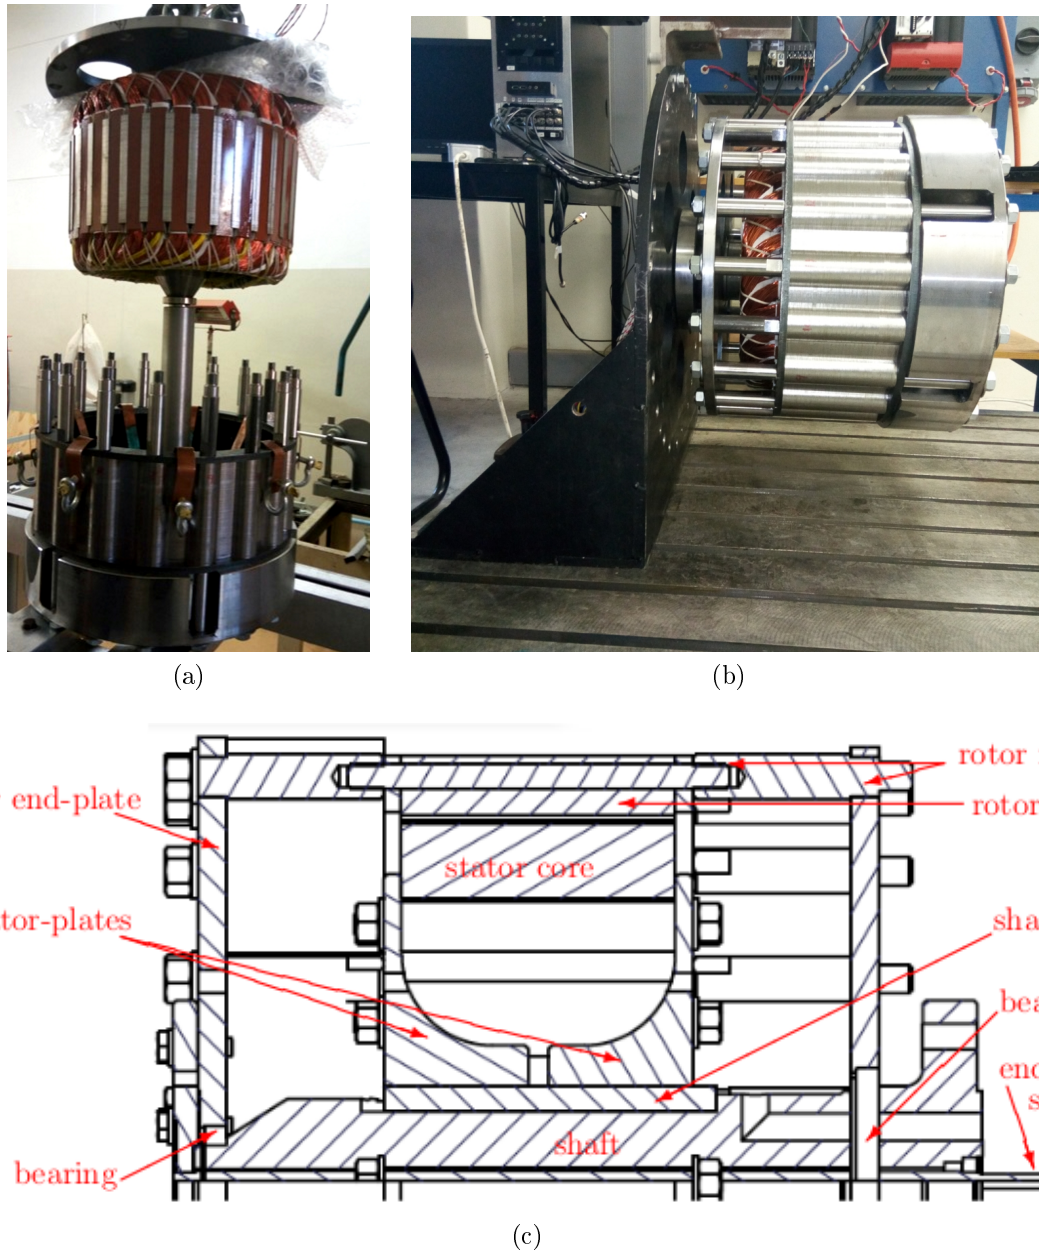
Machine assembling: (a) inserting the stator into the rotor (b) PMV machine on the test bench (c) longitudinal cross section of machine structure (winding not shown).
